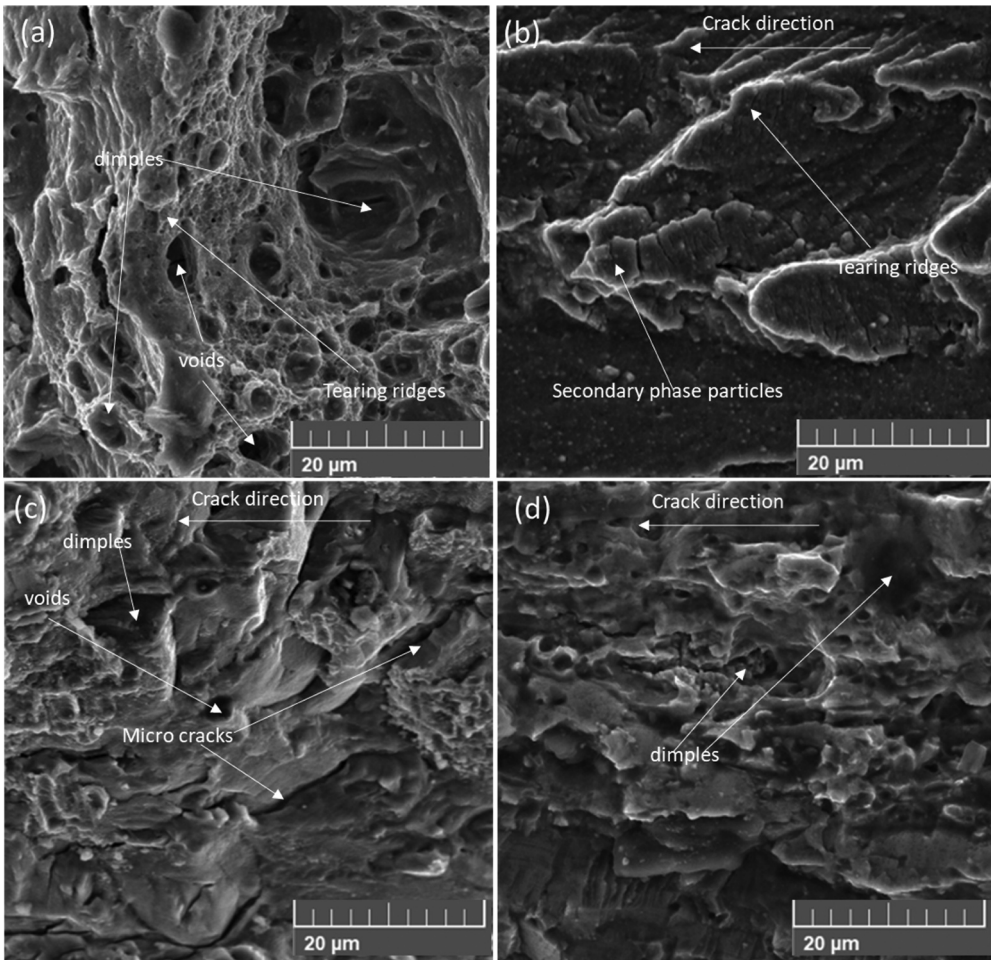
Fatigue crack initiation morphology of (a) Al alloy 7075-O countersunk rivet hole, (b) Al alloy 7075-O perpendicular rivet hole, (c) Al alloy 7075-T6 countersunk rivet hole, (d) Al alloy 7075-T6 perpendicular rivet hole.
